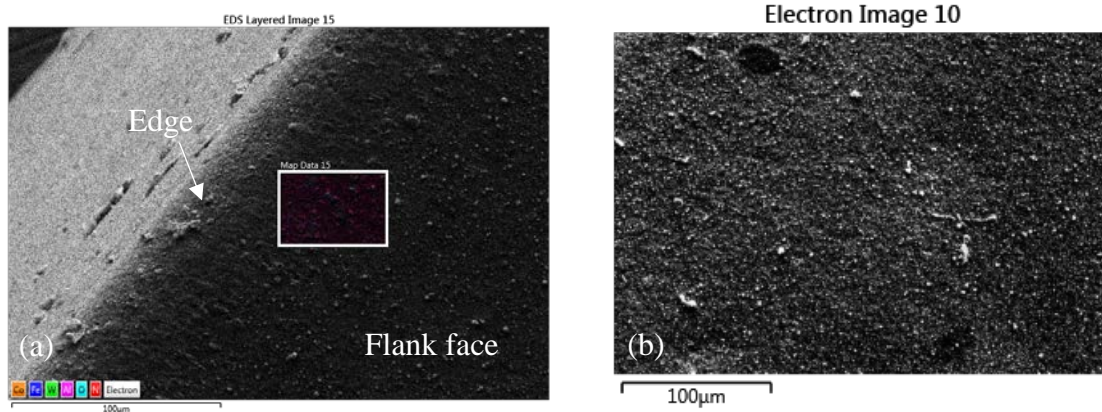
SEM micrographs of the flank face of an unused carbide tool. (a) An area of flank face near the edge was selected for EDS elemental mapping analysis (b) another image of the insert surface showing the external coated layer
